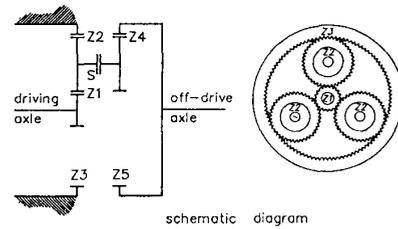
The new compact, high reduction gearing with integrated torque measurement and control.
